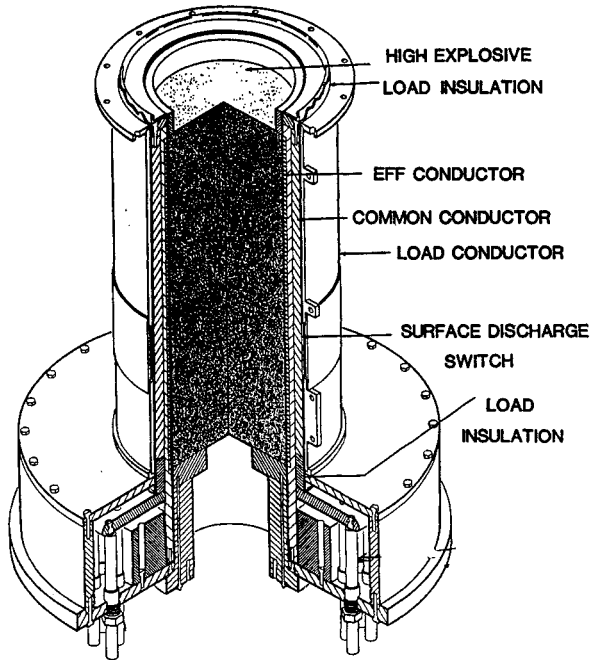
Explosively Formed Fuse with 72-cable transition section. As shown, the upper coax is intended to connect to a LAGUNA load. The cable adaptor region is filled with transformer oil.
